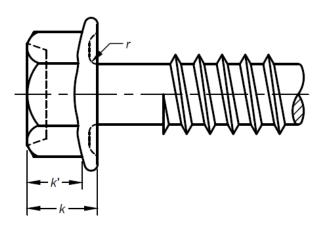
HEXAGON FLANGE HEAD DRILLING SCREW
